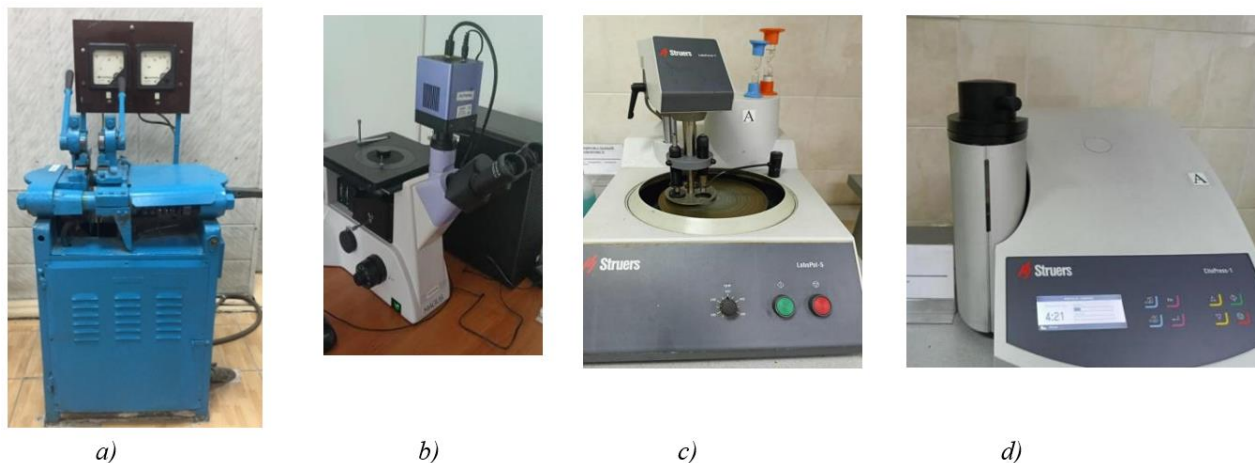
MCP-25 resistance butt welding machine and the equipment used in metallographic test: *a* - MCP-25 resistance butt welding machine; *b* - Magus optical microscope; *c* - LaboPol-5 grinding and polishing machine; *d* - Cito Press-1.
